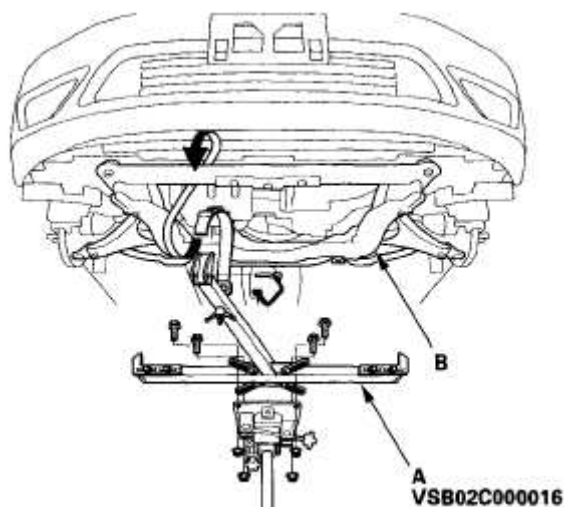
Identifying Front Subframe Adaptor To Front Subframe
